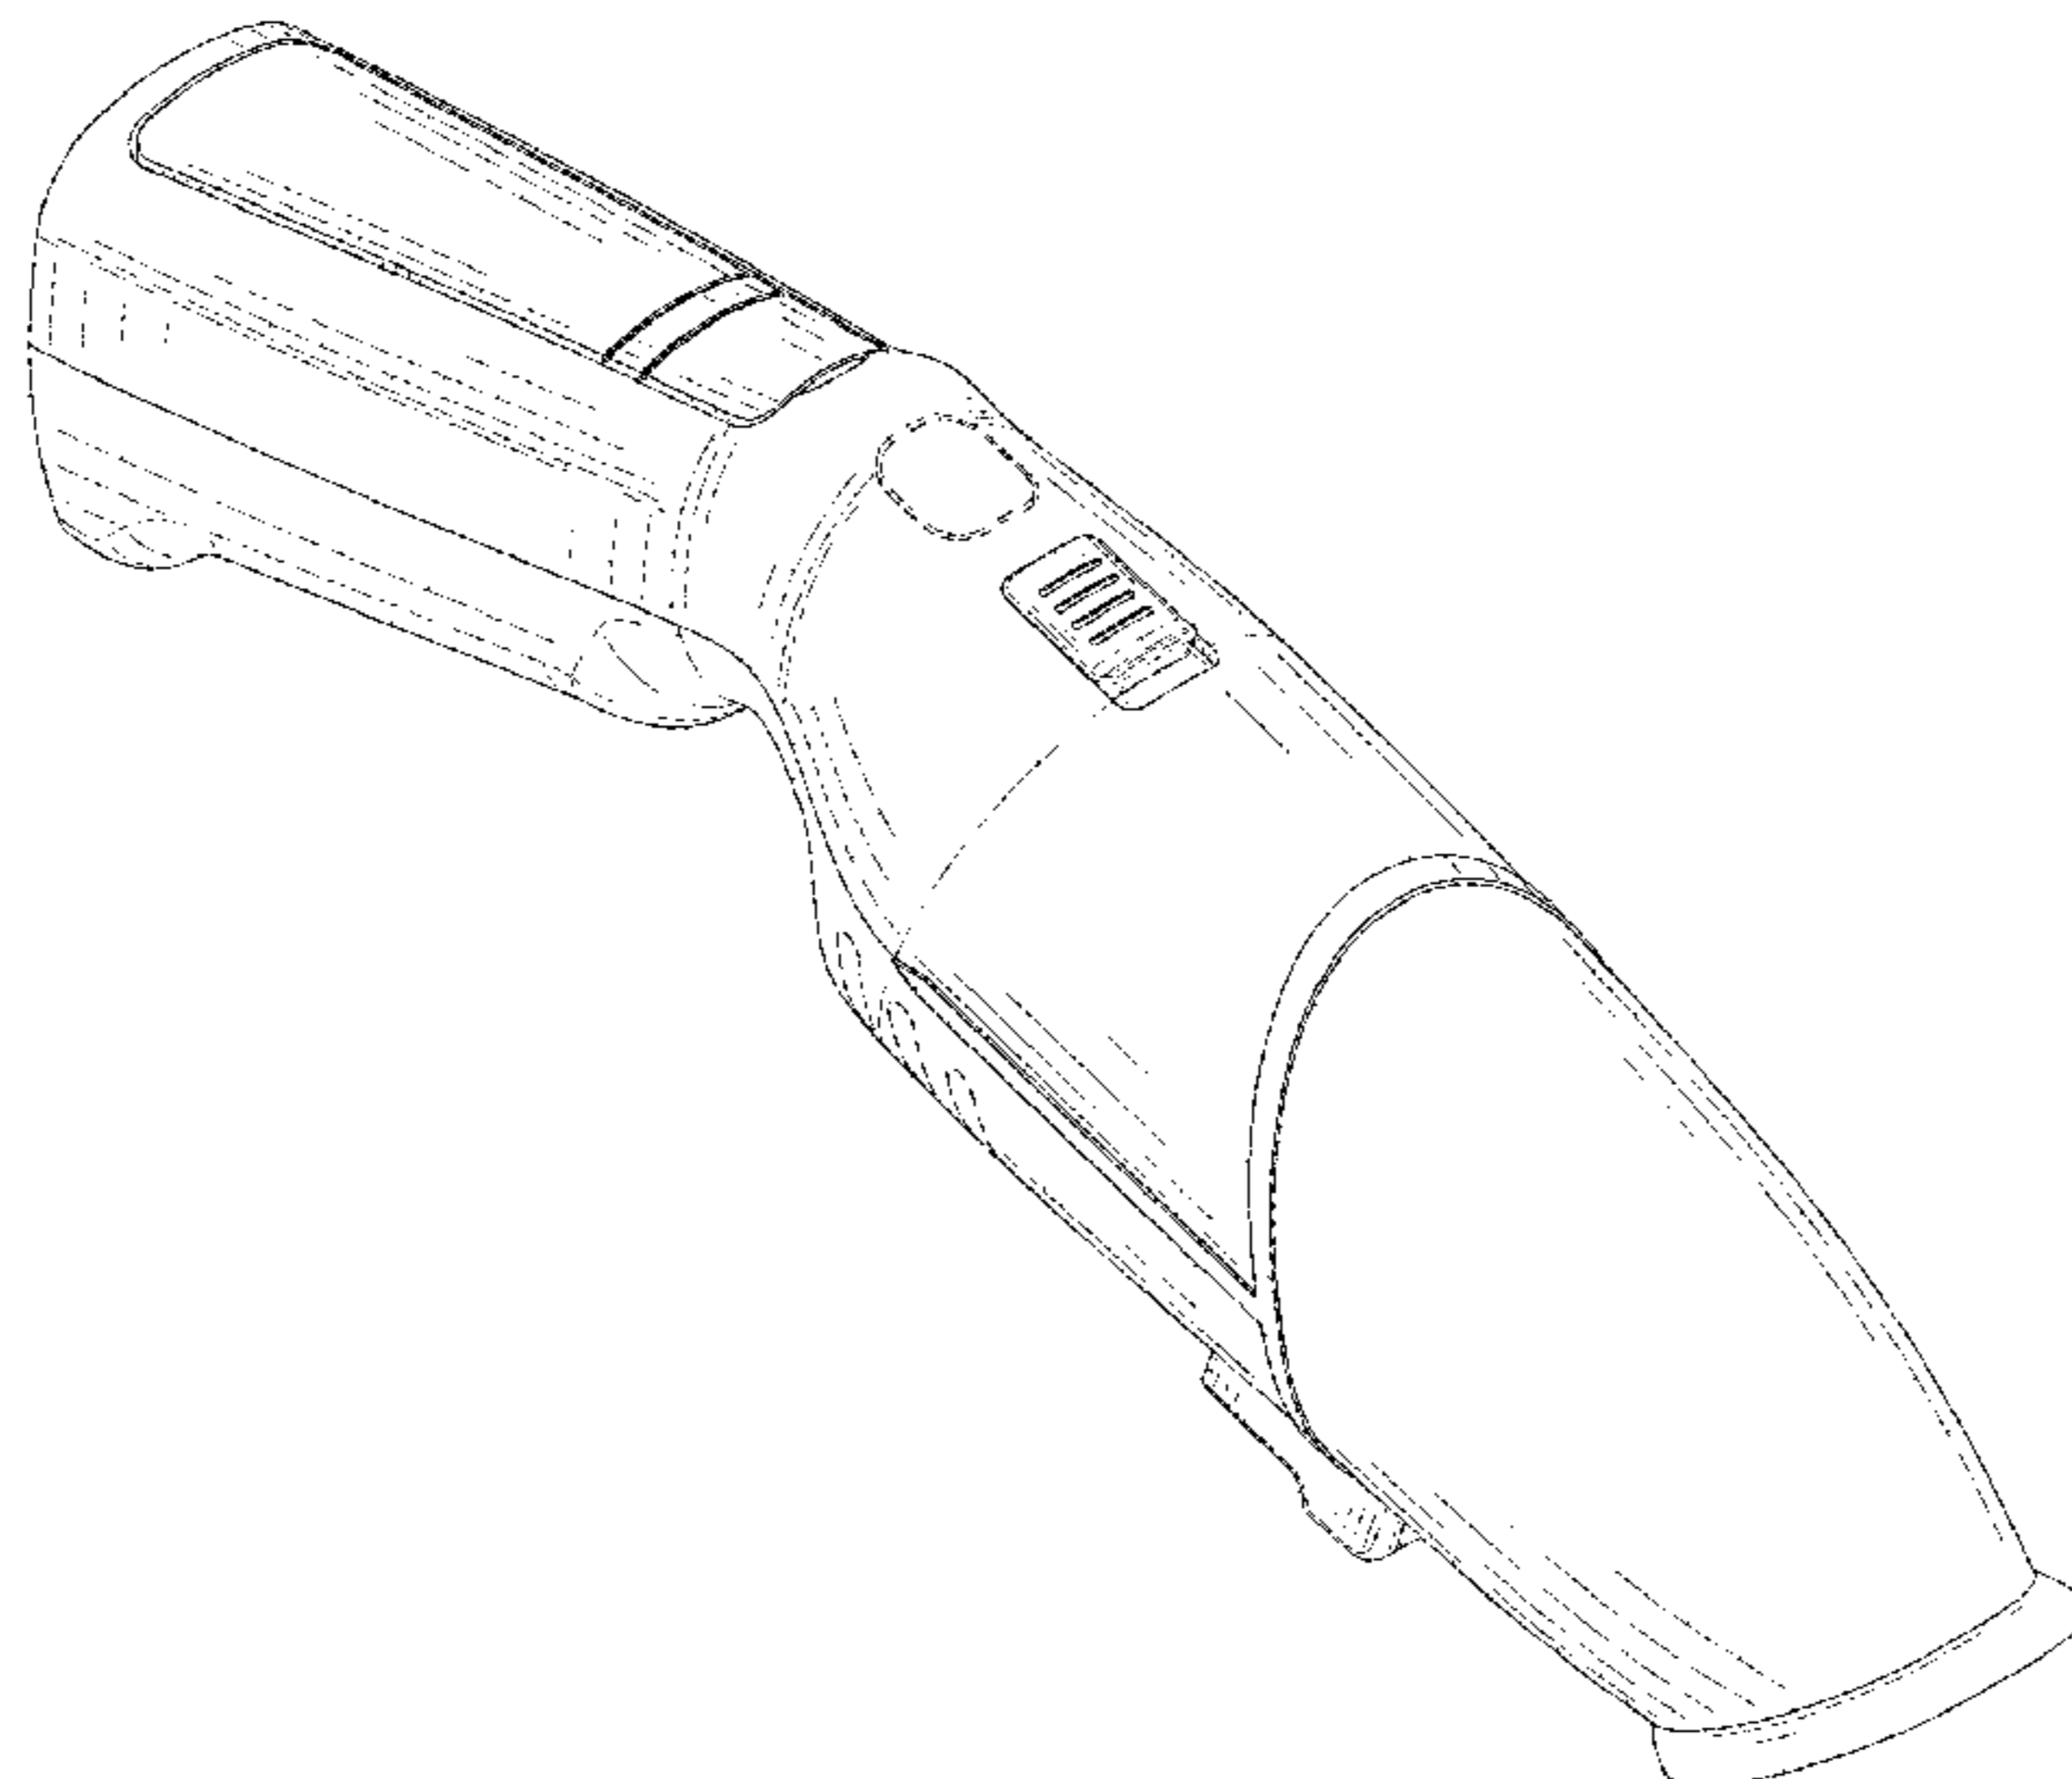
is a side perspective view of the new design of a vacuum cleaner;
